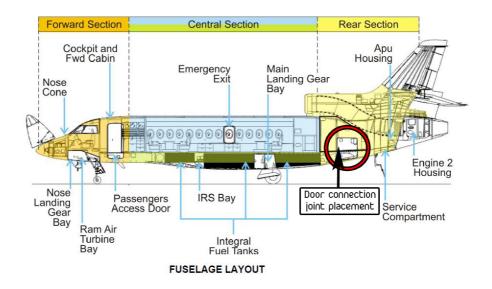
Door Connection Joint; Placement on the Falcon 900 Business Jet (image courtesy of [2])
